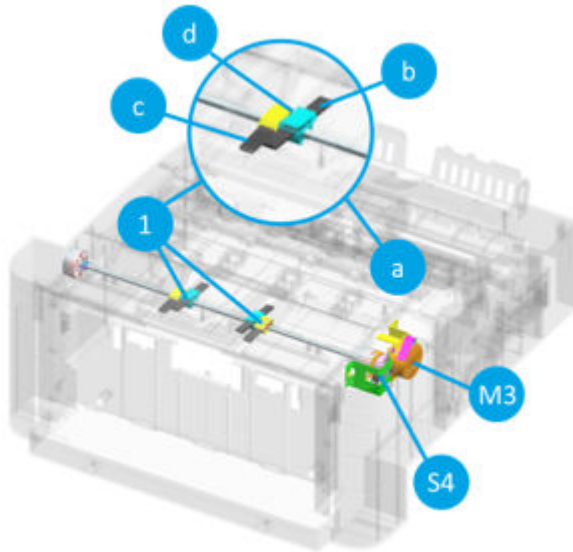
Inner finisher system - paddle unit driving system overview (sub paddle unit)
